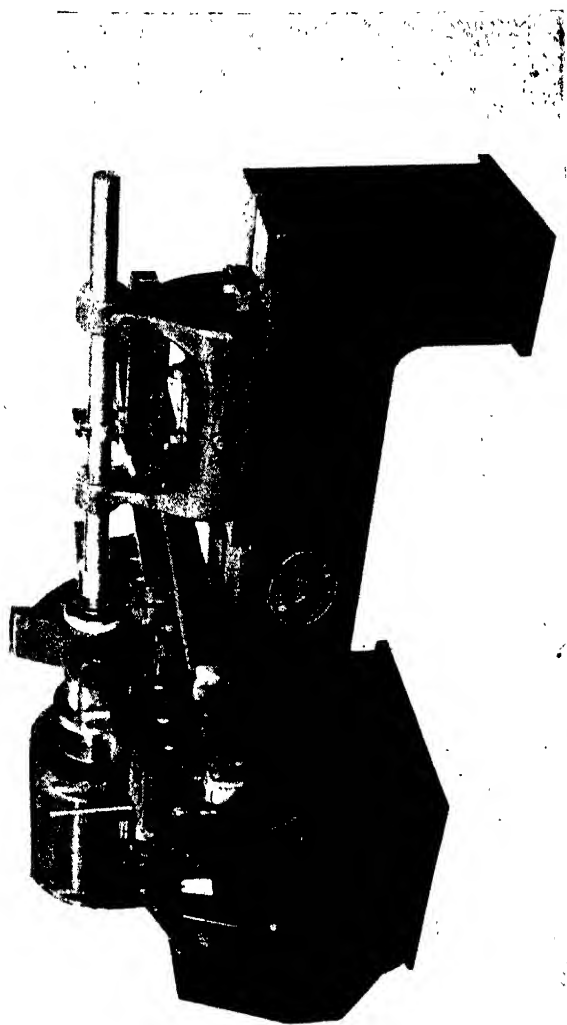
A BLISS NO. 16 METAL-SPINNING LATHE, FITTED WITH HYDRAULIC TYPE CROSS-SLIDE ATTACHMENT
